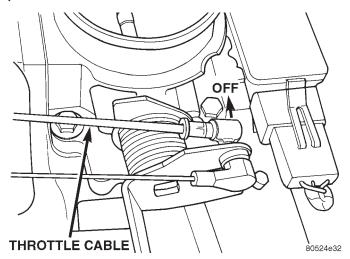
Throttle Cable at Throttle Body—4.0L Engine
